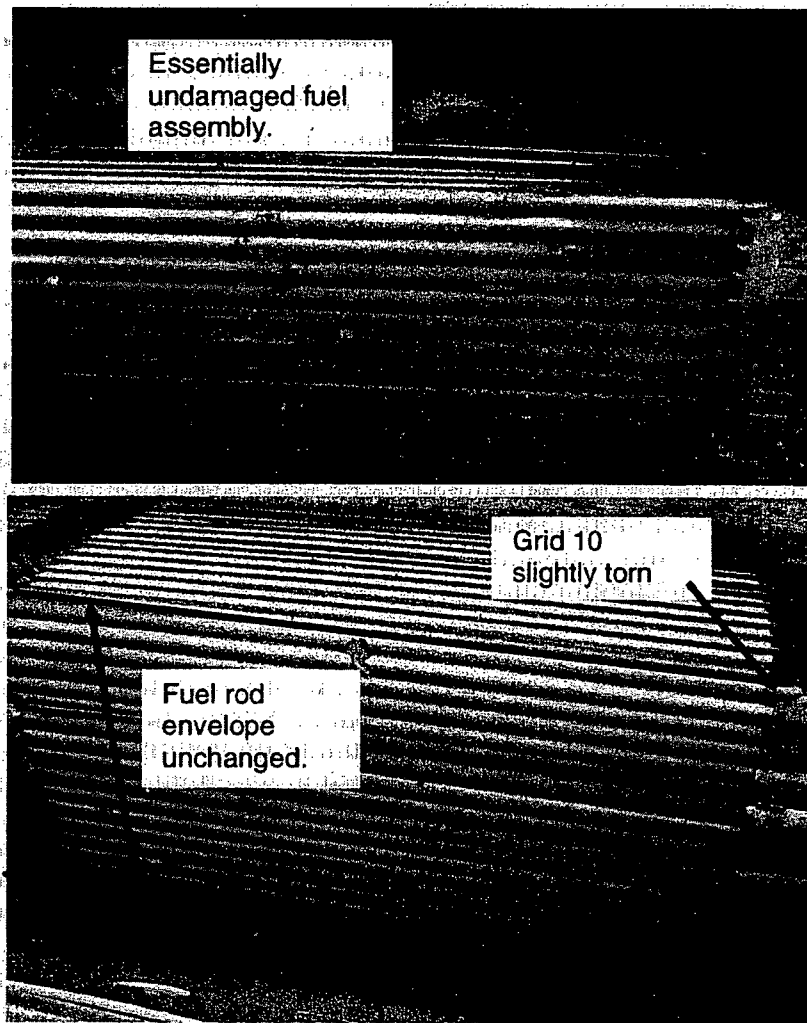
QTU-1 Fuel Assembly After Drop and Burn Tests
